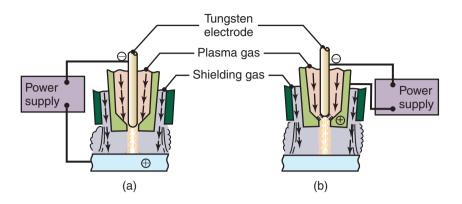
Two types of plasma-arc welding processes: (a) transferred and (b) nontransferred. Deep and narrow welds can be made by these processes at high welding speeds.
